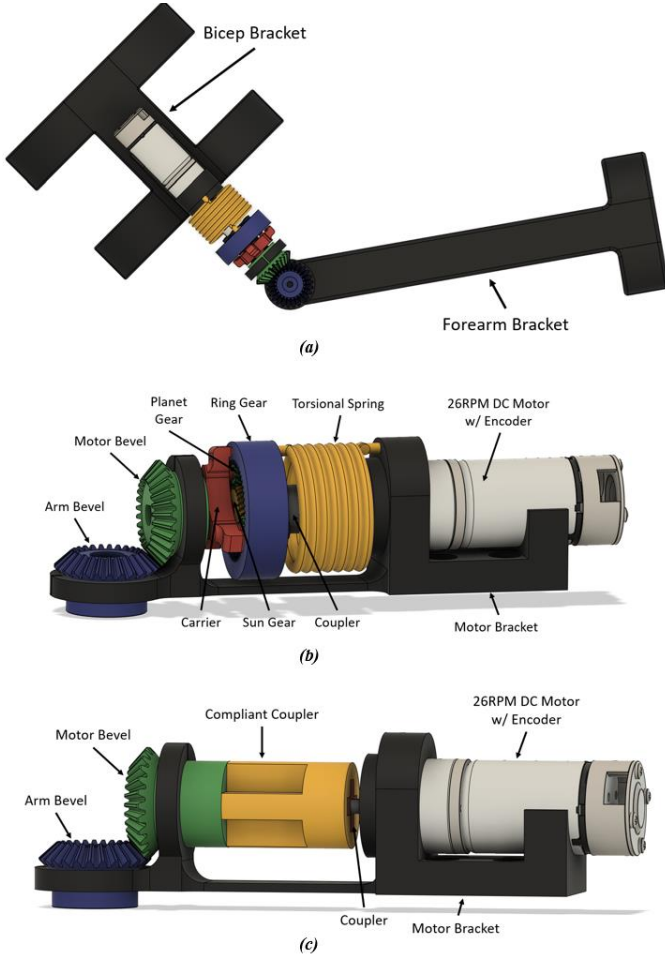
(a) Full-model design of the proposed torsional spring SEA device. (b) Component view of proposed torsional spring SEA actuator. (c) Component view of the proposed elastic element actuator.
